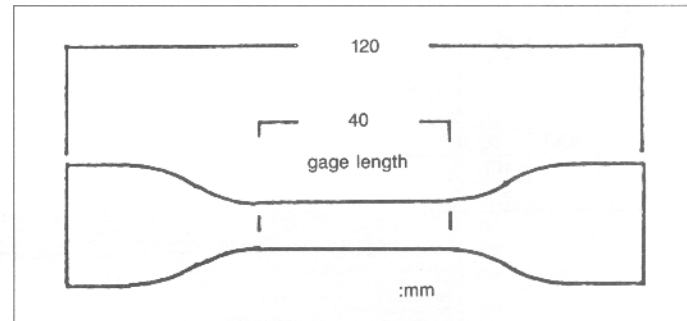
Dumbbell pattern No. 1 shaped test piece.
